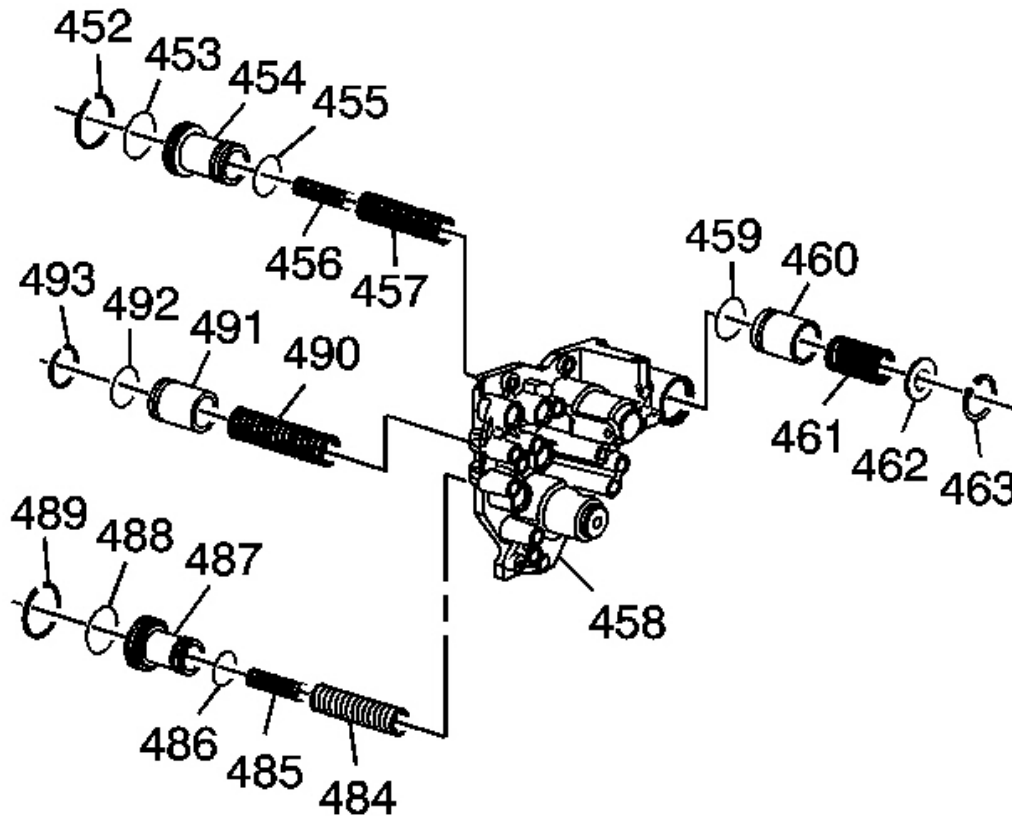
4th Clutch Accumulator Valve Body & Components Removed
